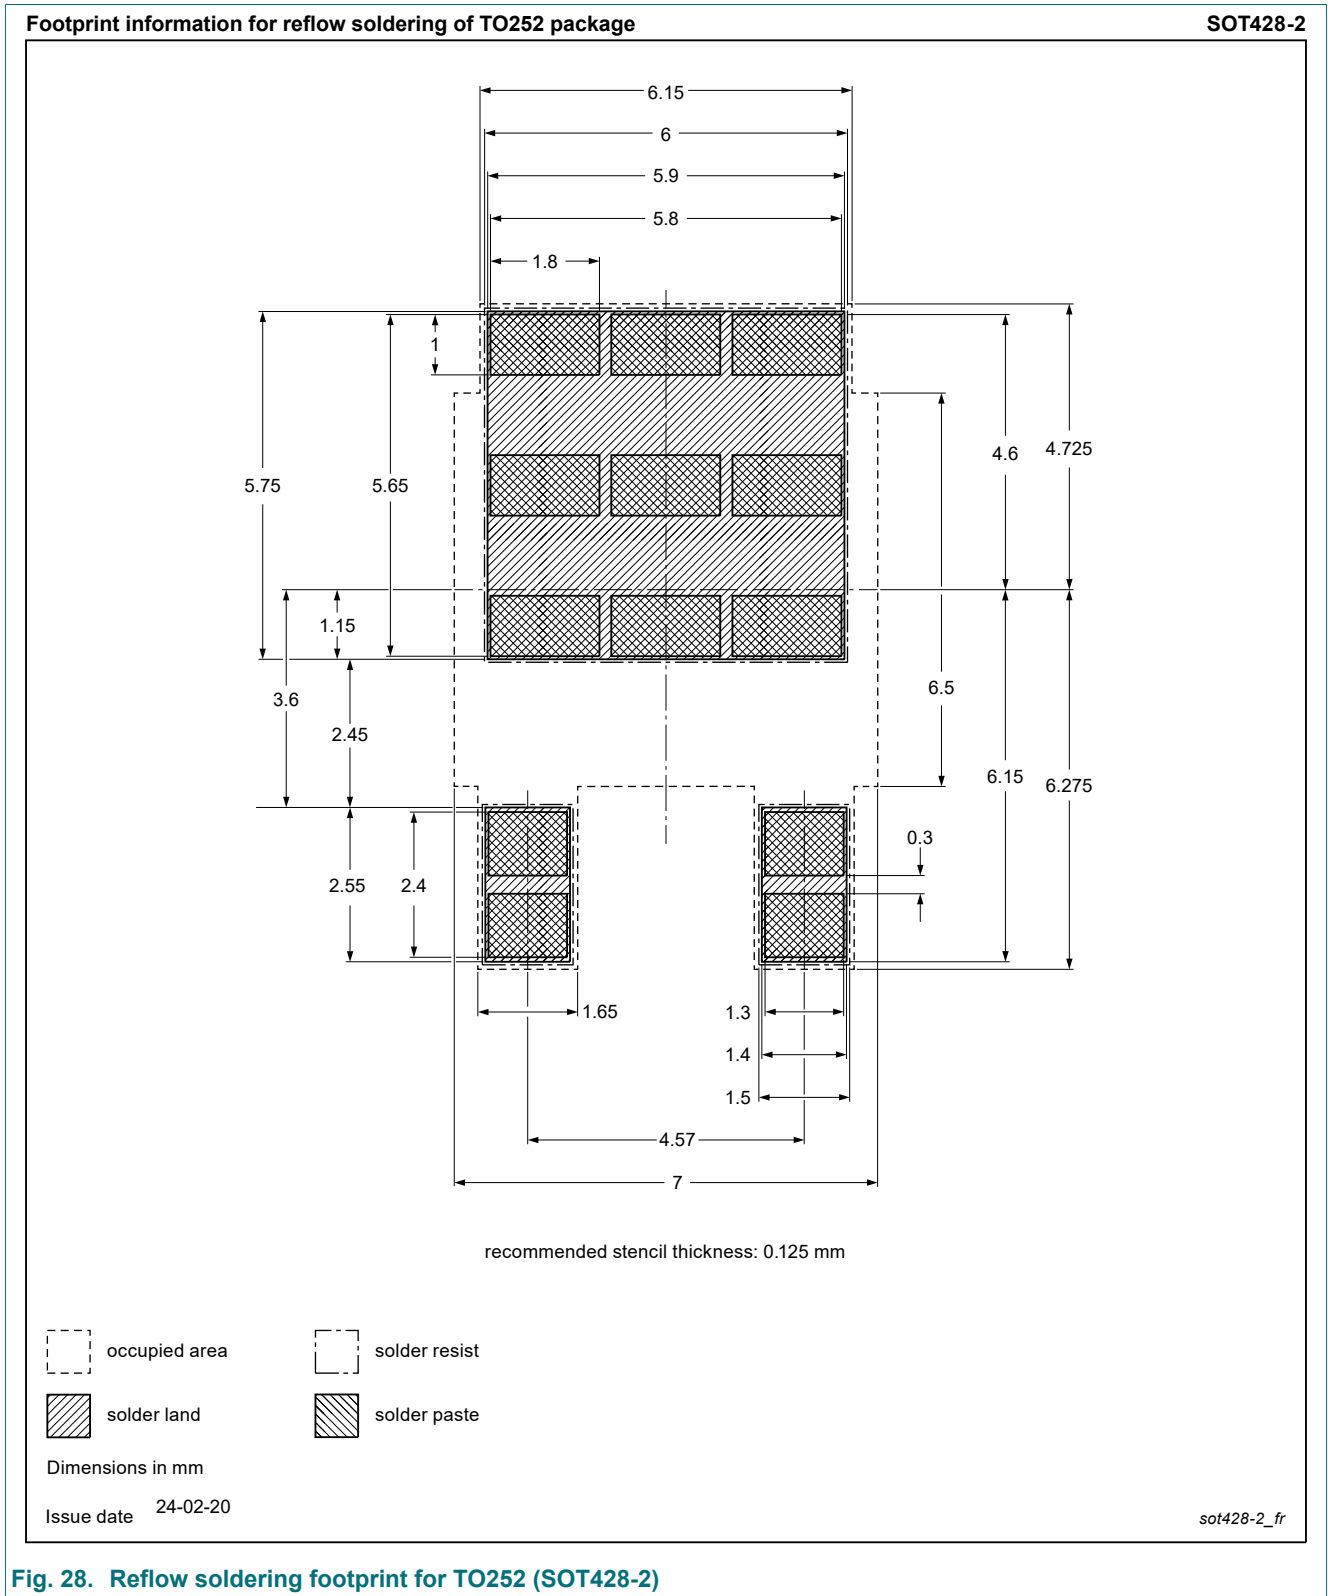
Reflow soldering footprint for TO252 (SOT428-2)
